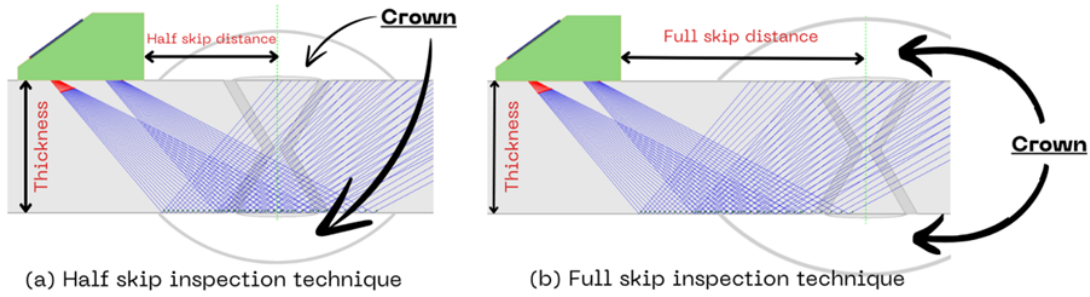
Weld sample having inspection with different skips to cover the entire weld region
